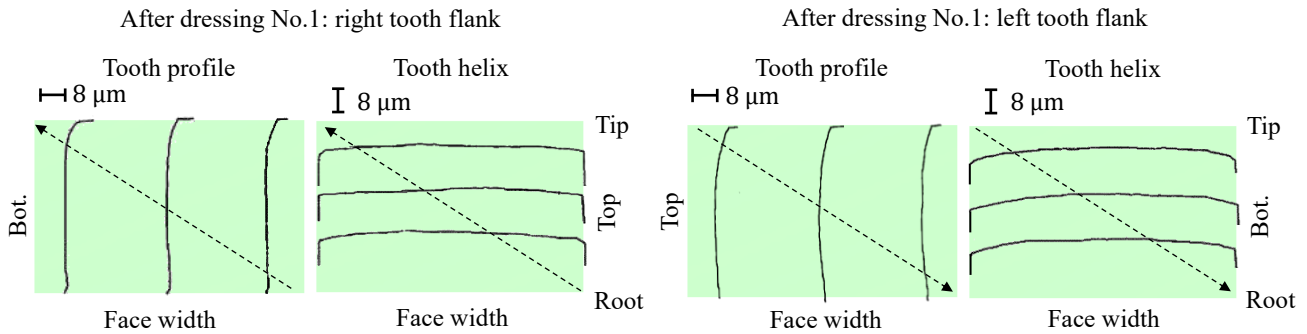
Honing experiment results obtained with honing wheel A. The left side figure shows the measured tooth-profile and tooth-helix micro geometries of the right tooth flank, and the right side figure indicates the measured tooth-profile and tooth-helix micro geometries of the left tooth flank. These micro geometries aligned with the measurement position of gear accuracy and superimposed with the results in Fig. 15.
